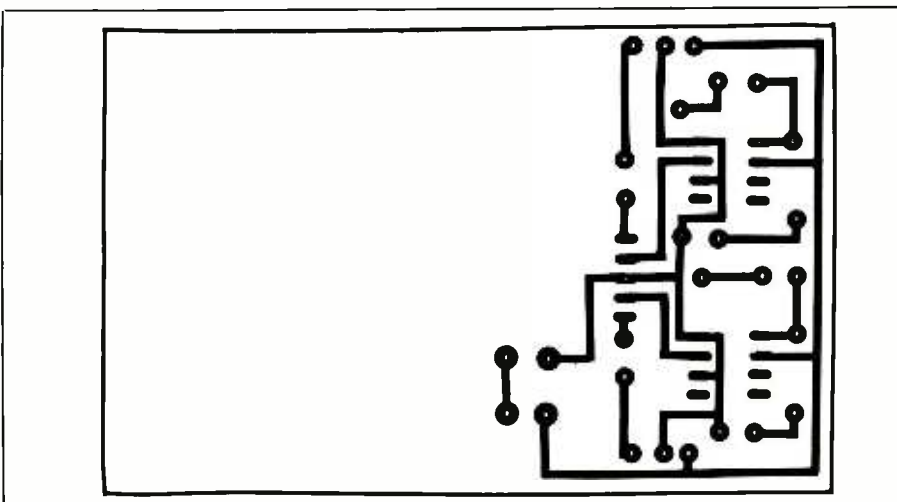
Actual-size etching-and-drilling guide for home fabrication of printed-circuit board.
